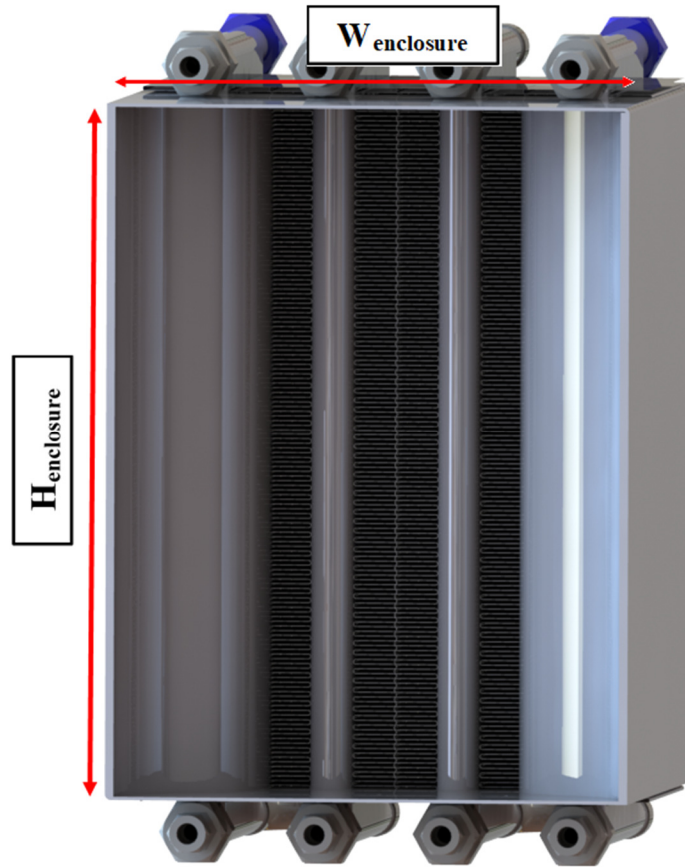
Test section assembly model shown with shroud and converging sections installed
